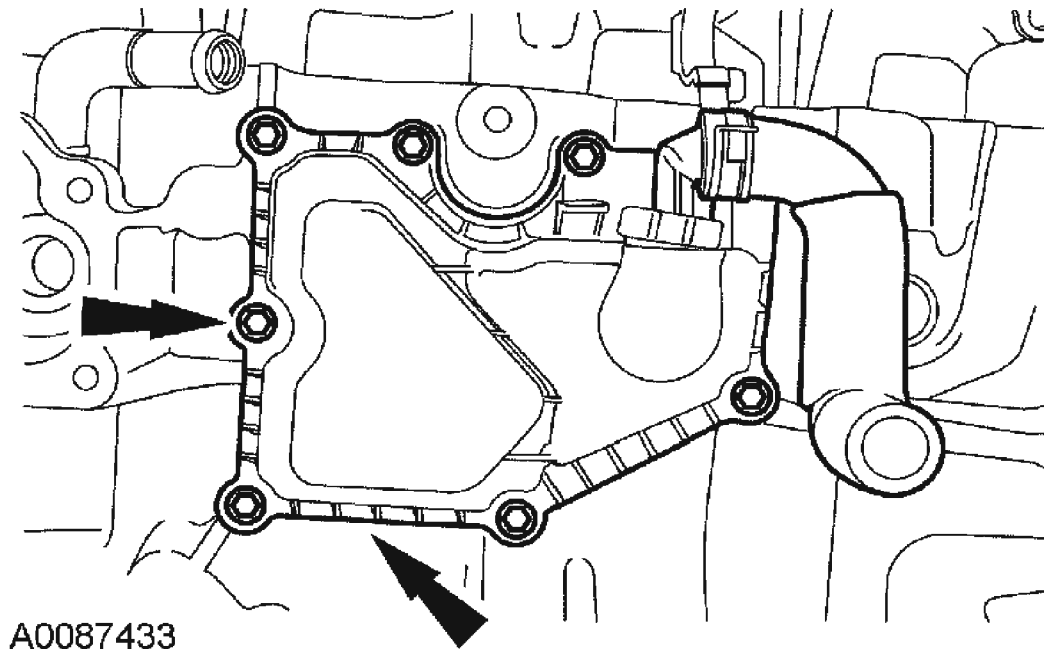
Removing Bolts And Crankcase Vent Oil Separator
